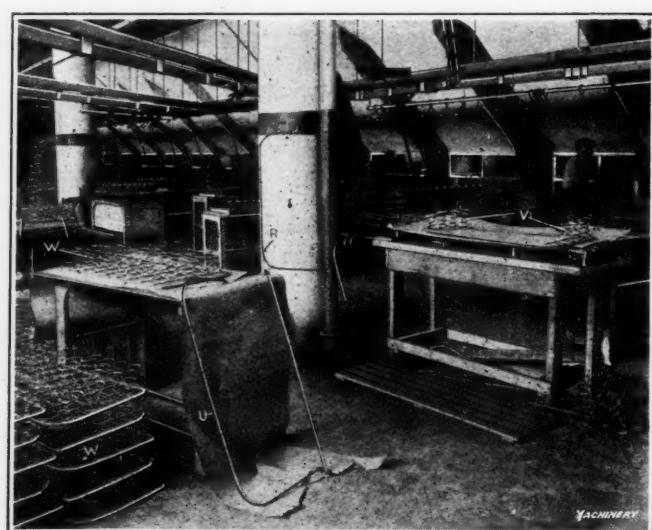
Benches on which Seat Springs for Ford Cars are assembled
